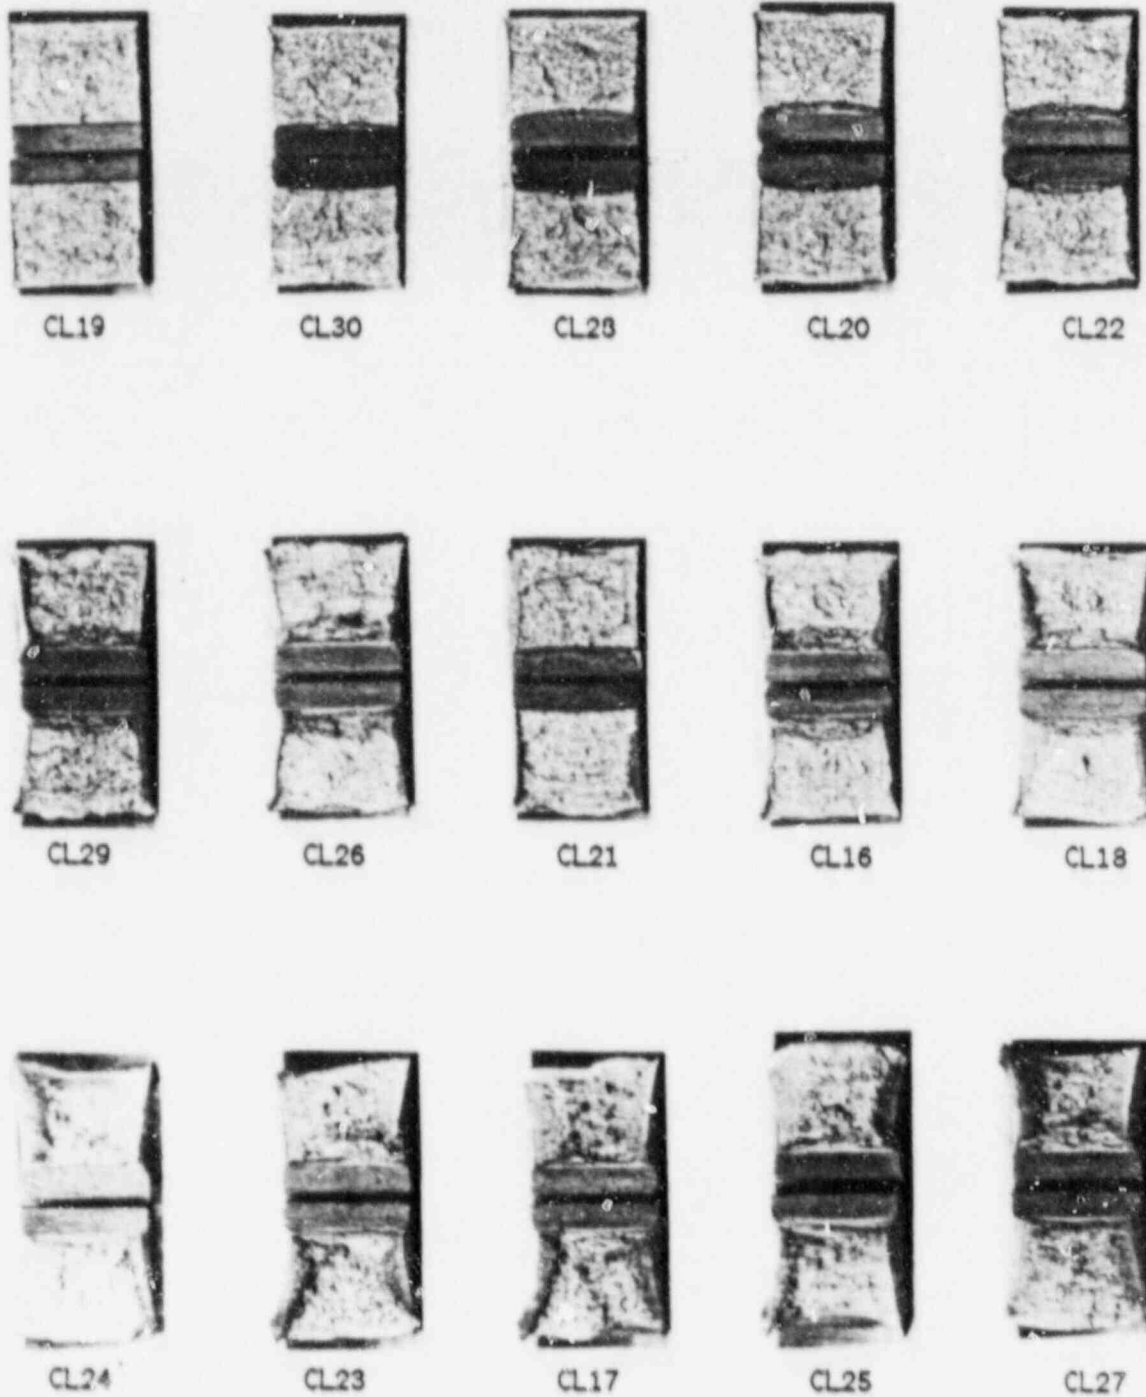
Charpy impact specimen fracture surfaces for V. C. Summer Unit 1 reactor vessel shell Plate A9154-1 (longitudinal orientation)
